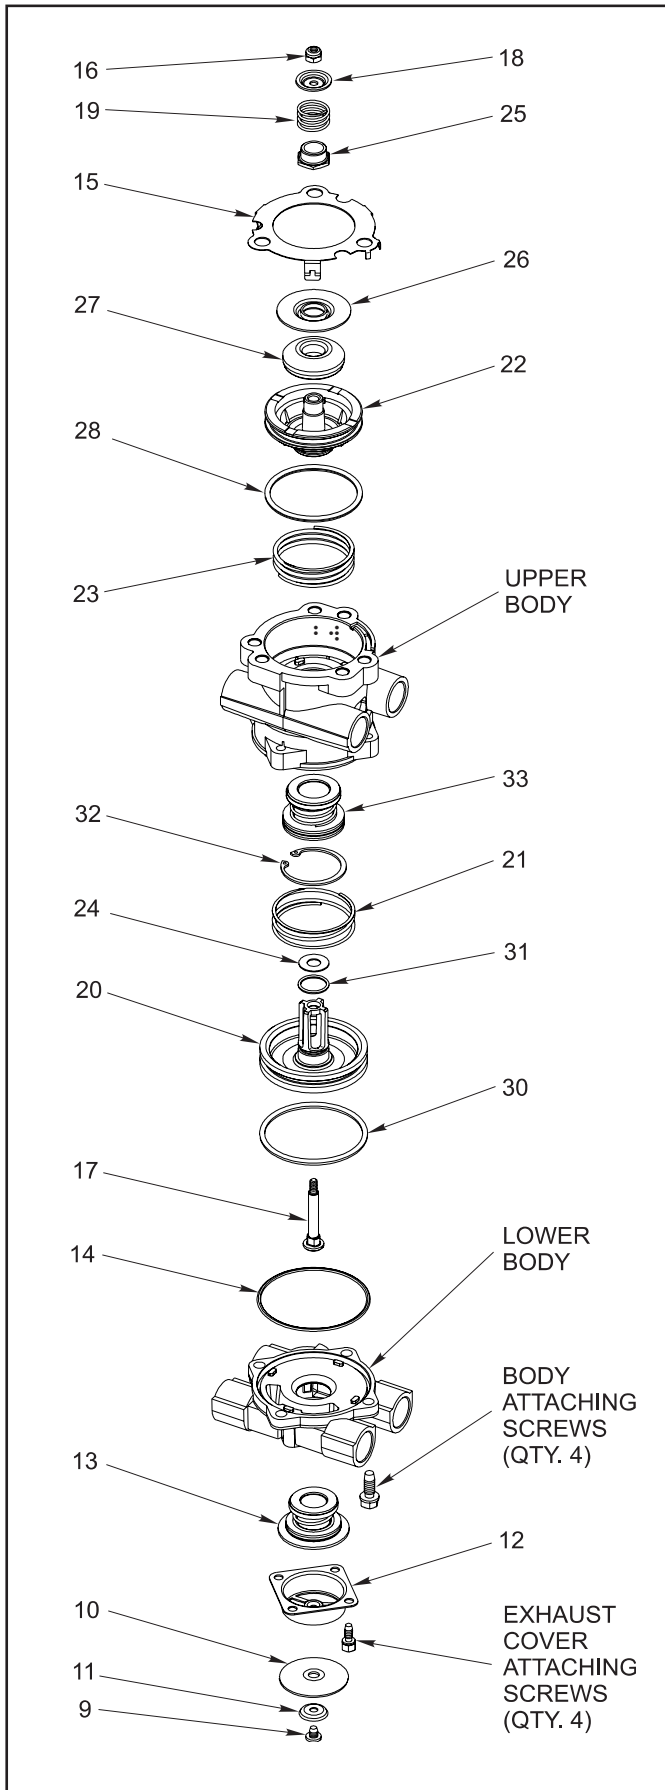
E-8P™ DUAL BRAKE VALVE - EXPLODED VIEW
